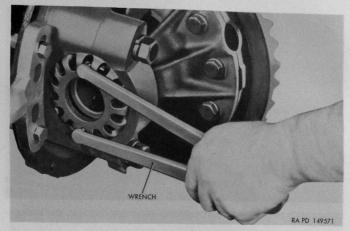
Adjusting drive gear and pinion with spanner wrench 41-W-3247-500.
